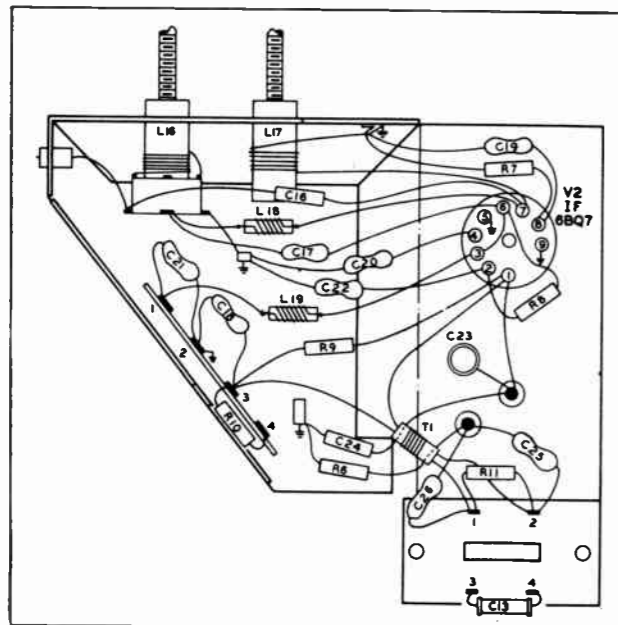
Base View of Tuner-Adapter Part No. 43-6474, Preamplifier Assembly
